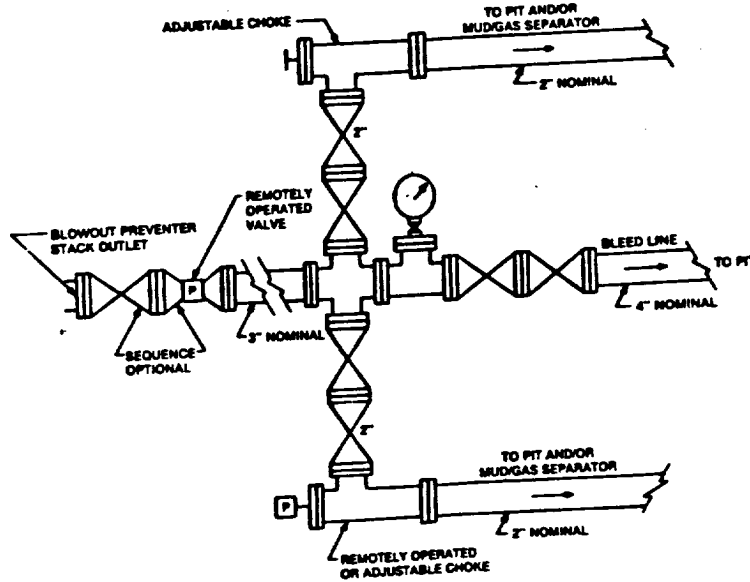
Typical choke manifold assembly for 5M rated working pressure service — surface installation.
